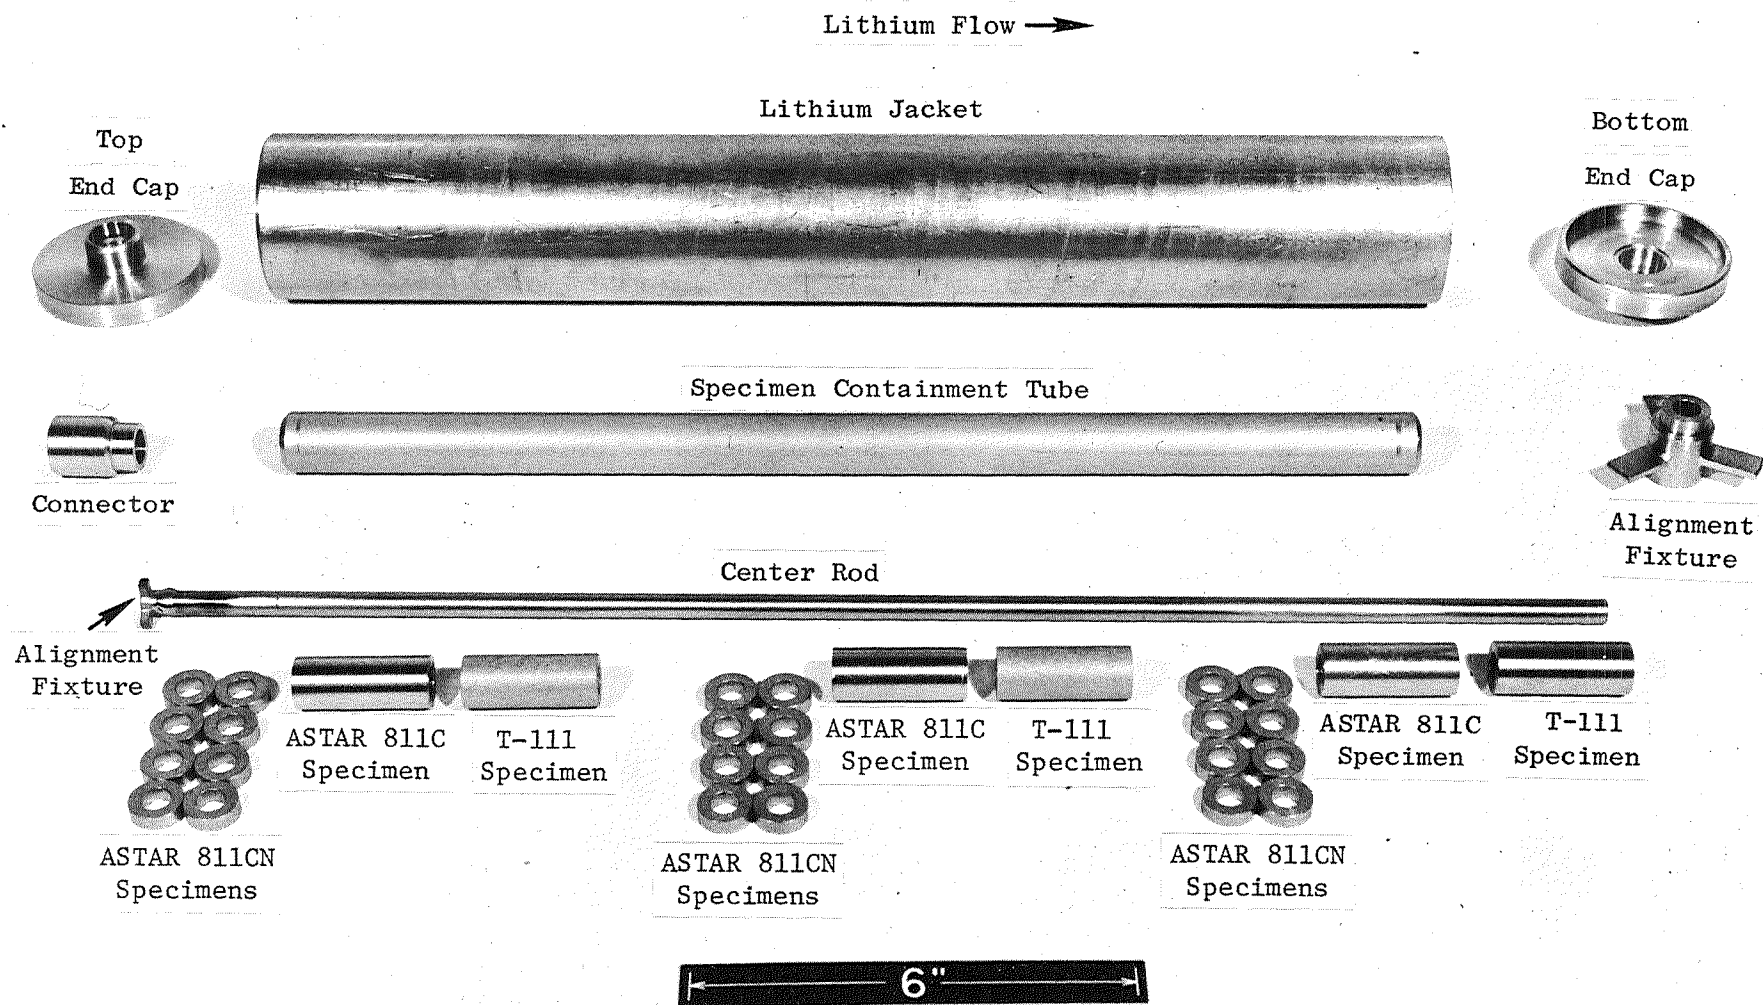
Components of Corrosion Specimen Subassembly - 1900°F Lithium Loop.
